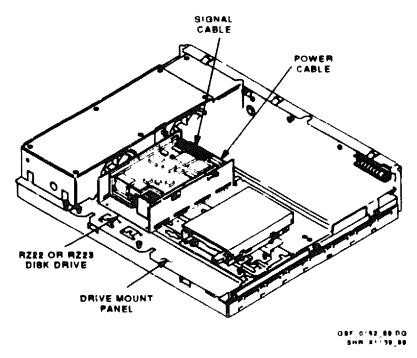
Removing the RZ22, RZ23, and RZ24 Disk Drives
